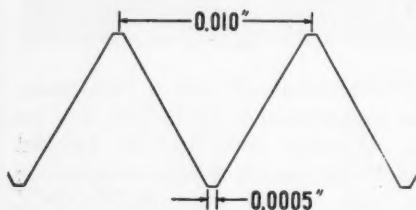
Enlarged Outline of the Ground Thread Form of a 100-Pitch Thread Gage
